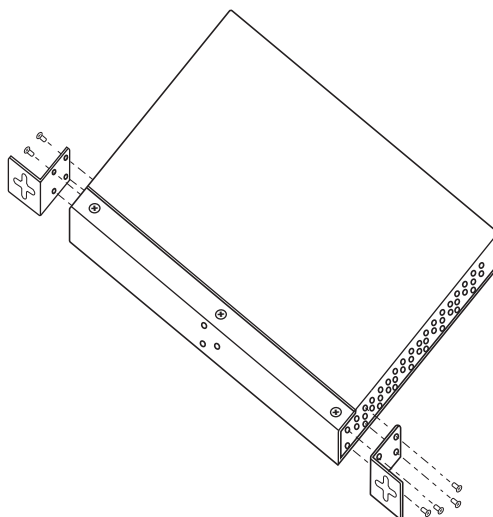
ATTACHING THE WALLMOUNT BRACKETS
